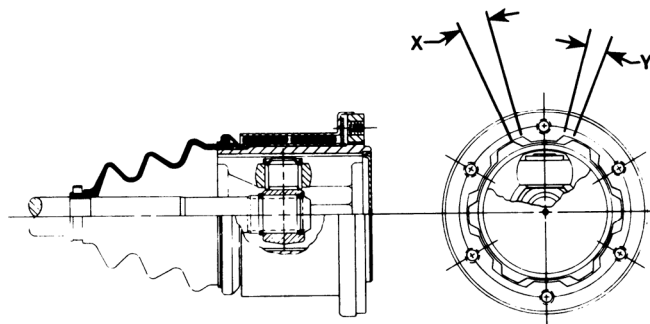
INBOARD CV JOINT MOUNTED ISOLATION DAMPER
